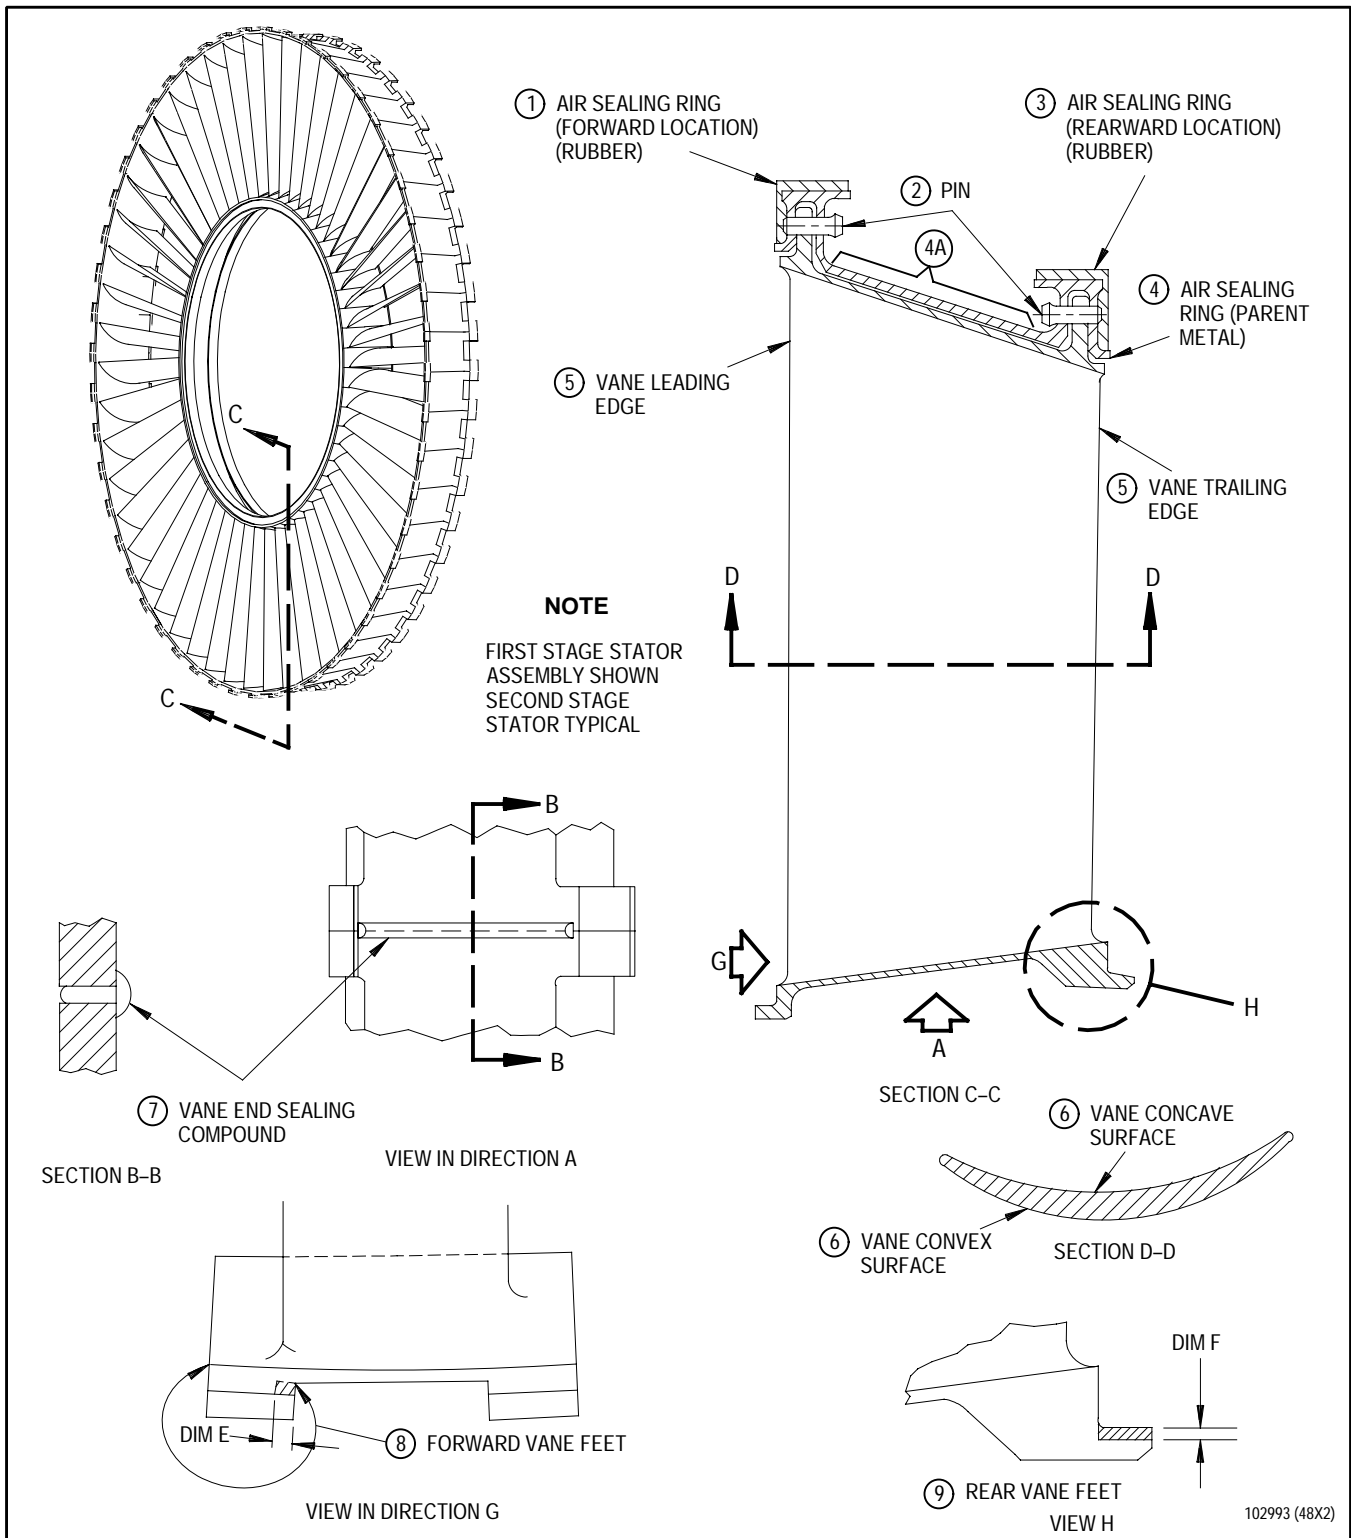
First and Second Stage Compressor Stator Assemblies - Inspection
